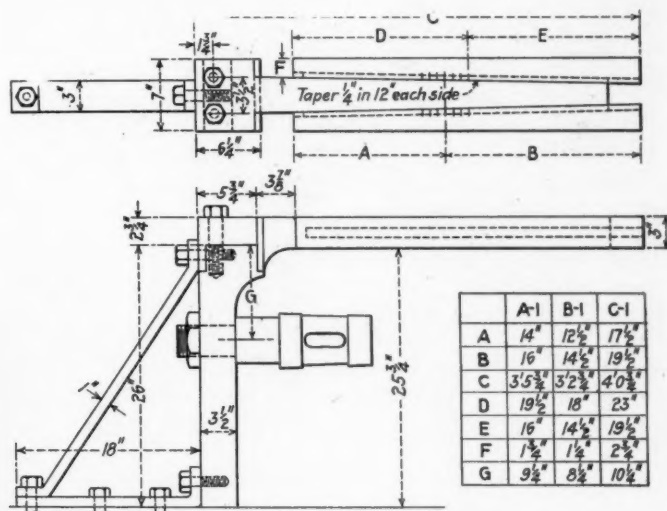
Details of Fixture Used in Babbitting Alligator Crosshead Gibs
